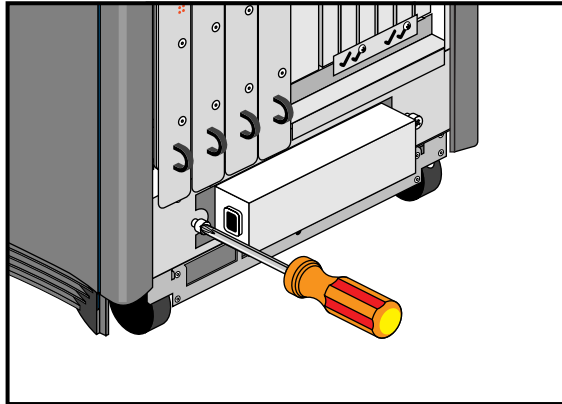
Removing/Installing the Fan Tray Screw From Rear of Chassis
